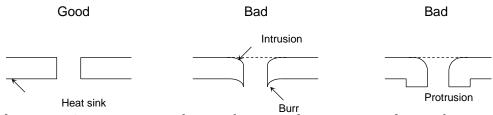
Burrs, Intrusion and Protrusion on Mounting Holes
